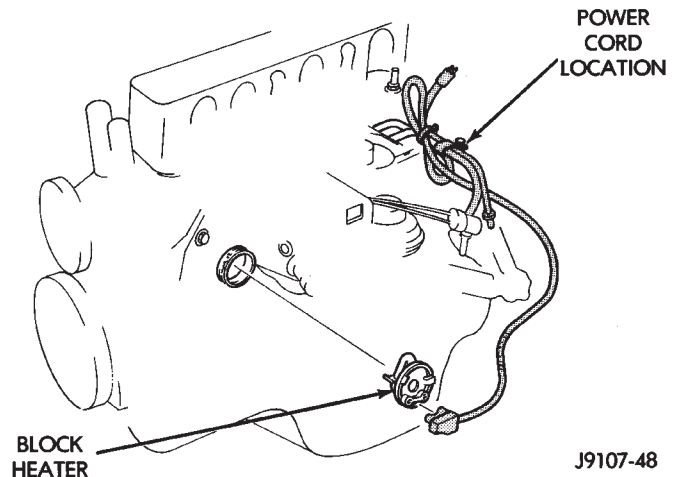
Heater and Cord—XJ with 2.5L Engine
